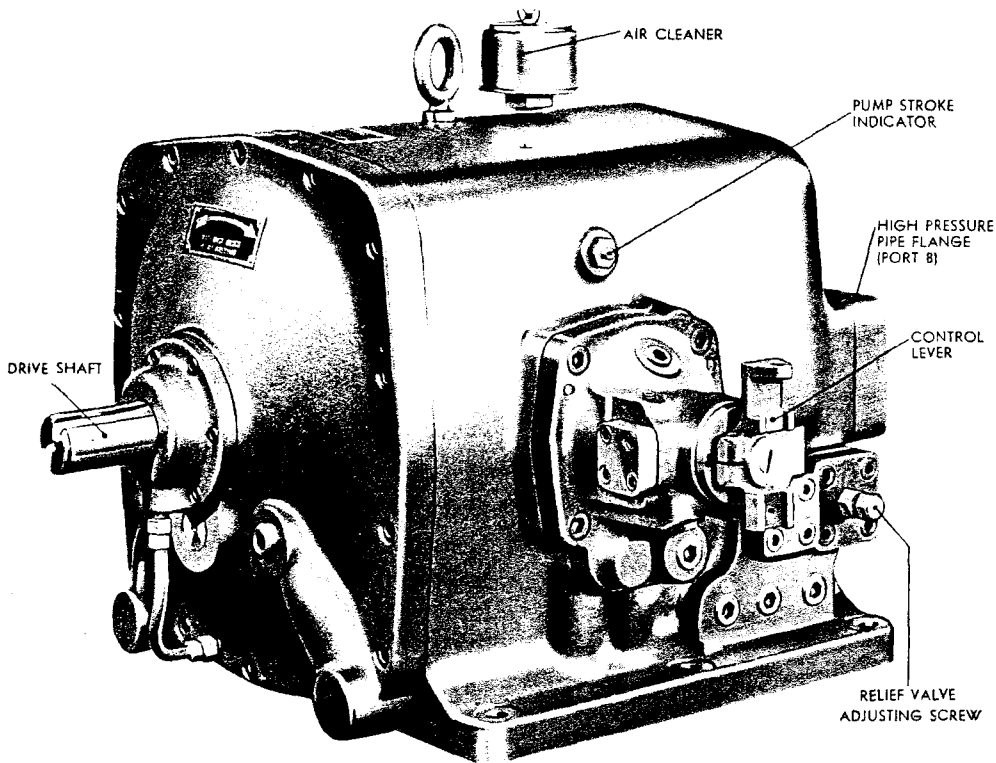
Type "DH" Port Pump, Three-Quarter View, Shaft End
